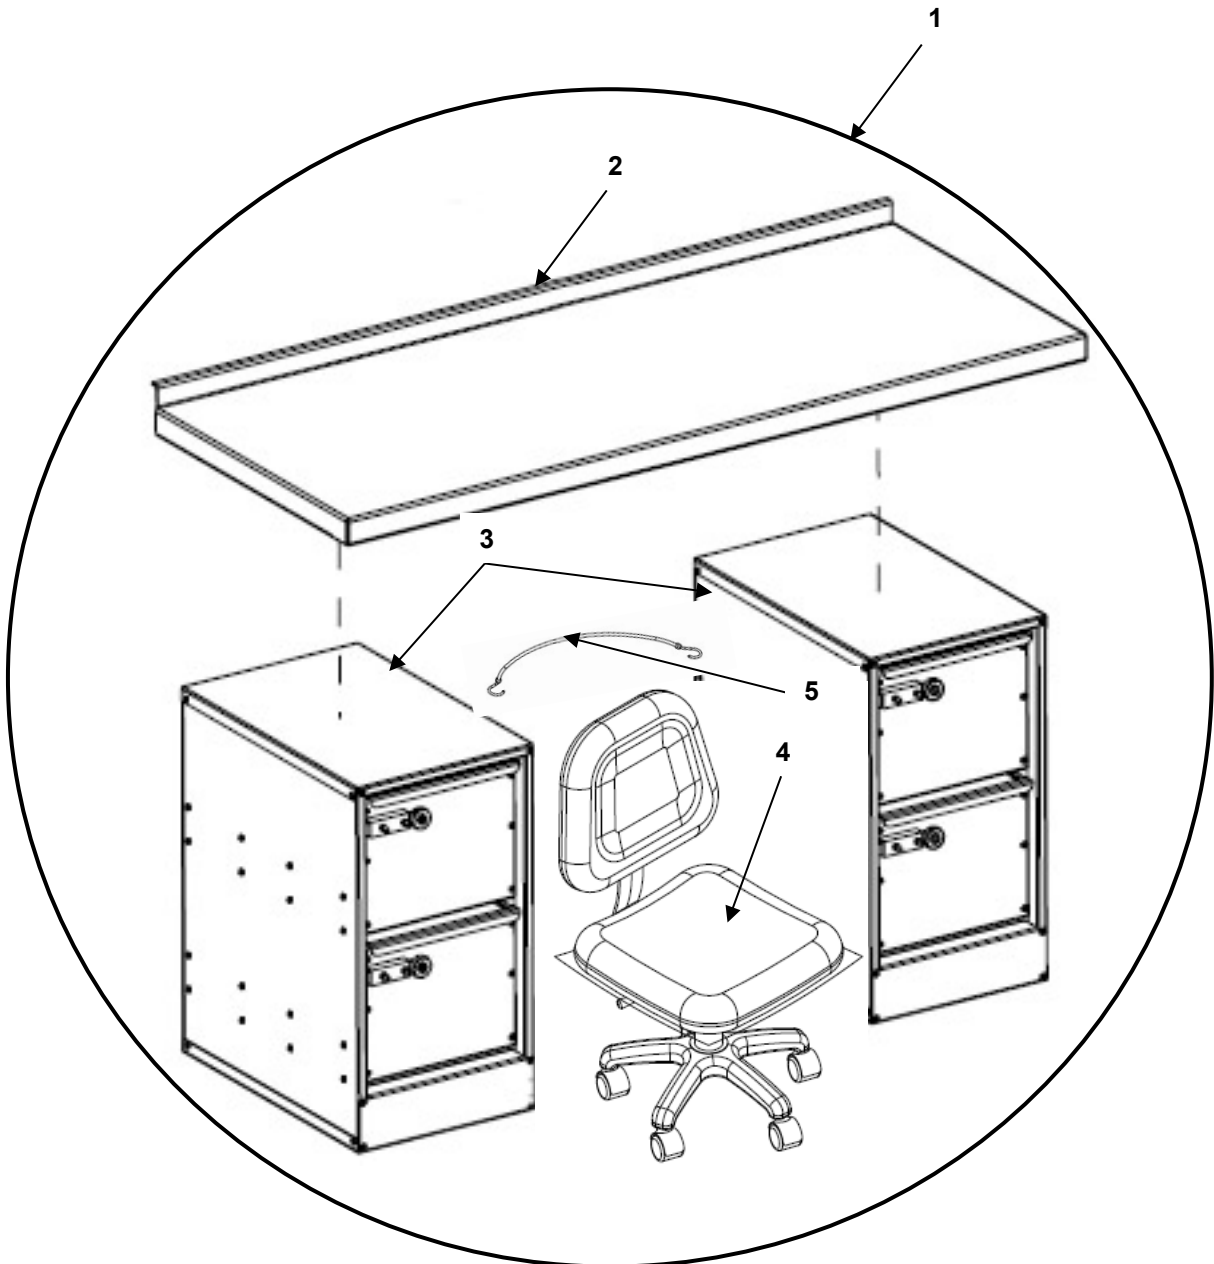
LEFT SIDE DESK ASSEMBLY
